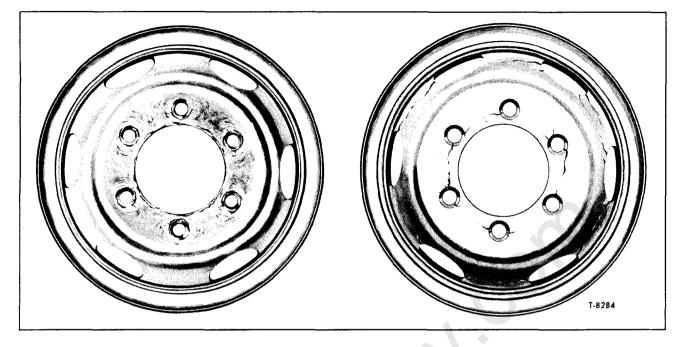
Worn Wheel Stud Holes and Cracked Disc Wheels
